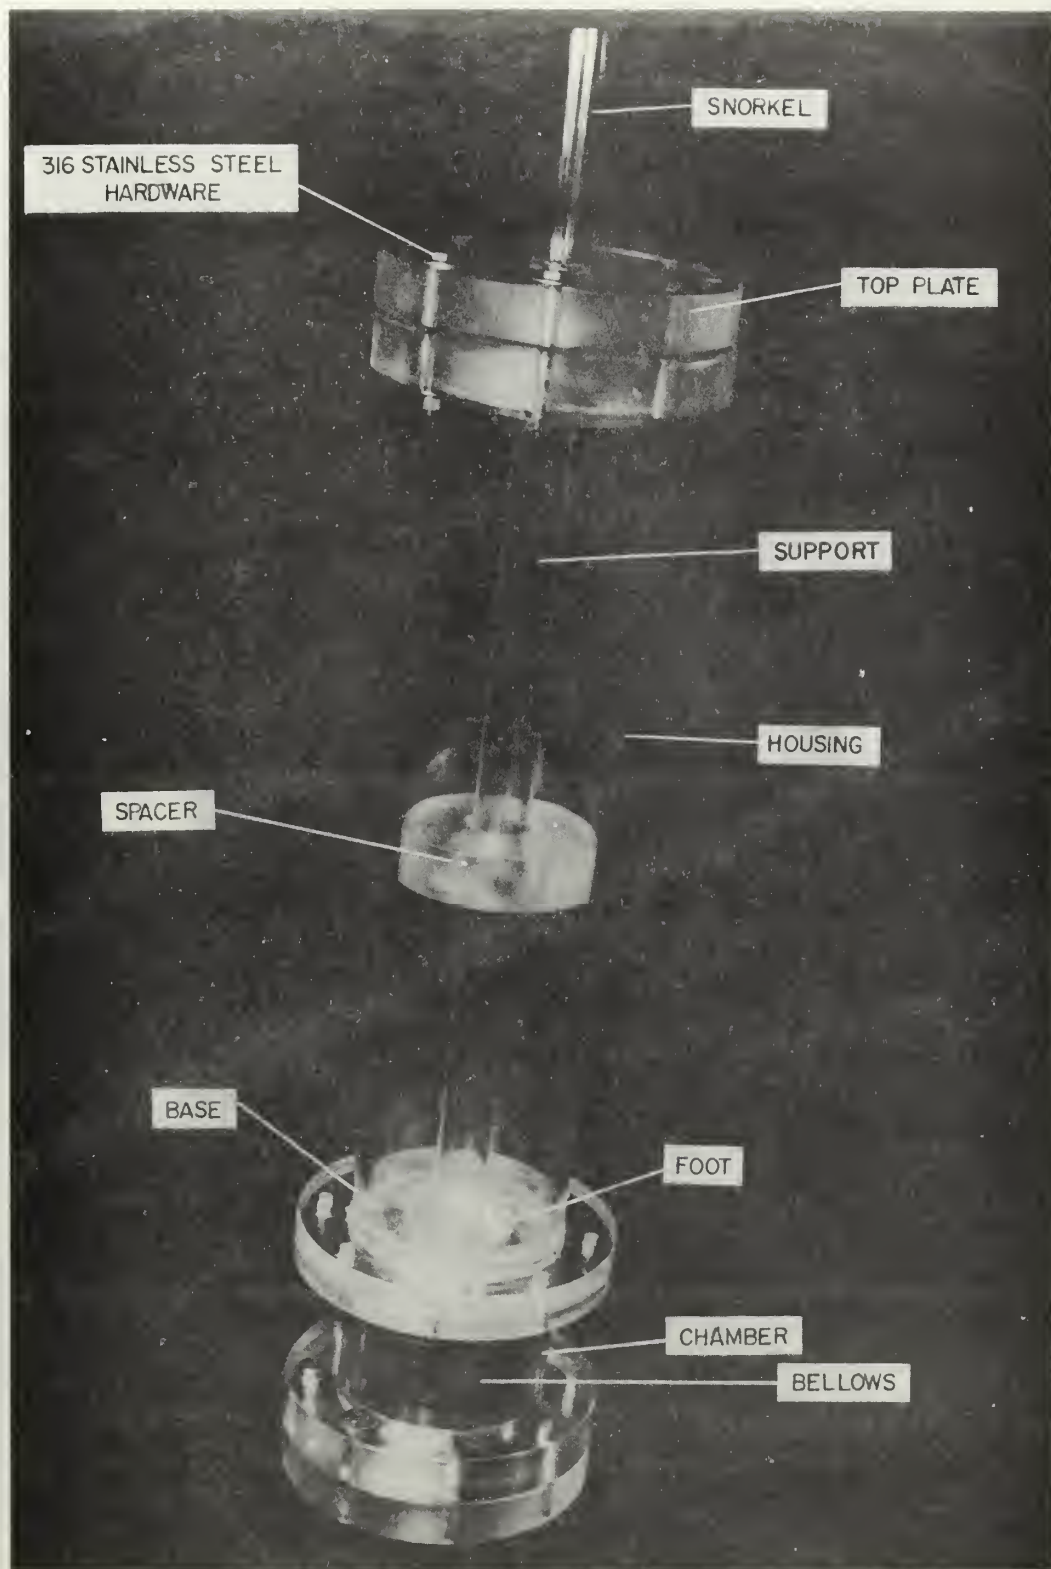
PROTOTYPE WITHOUT SENSOR ASSEMBLY
